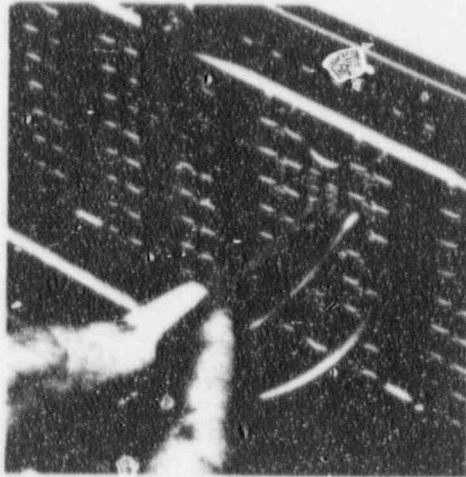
Removal of a socket-equipped lead using an extractor type RTX D.
